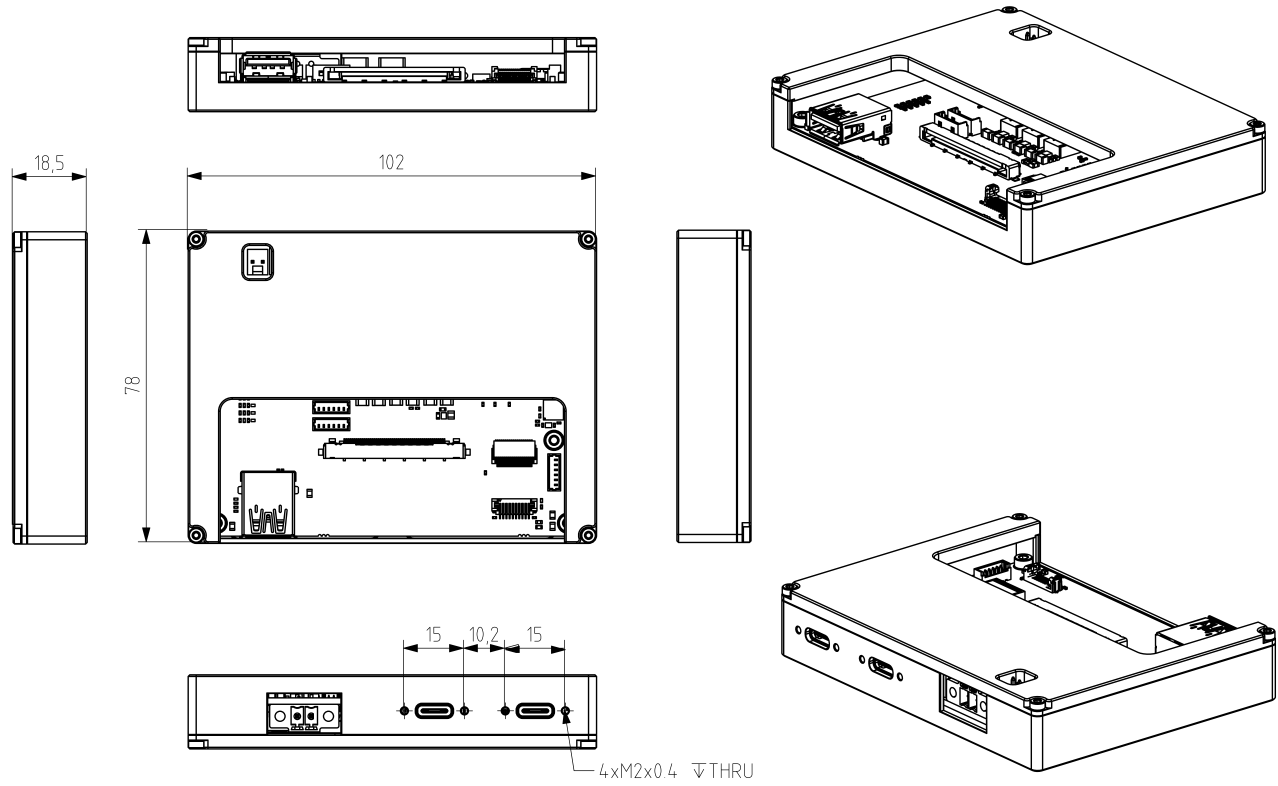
Dimensional drawing of XS-2P-X4G3-TBT3-S
